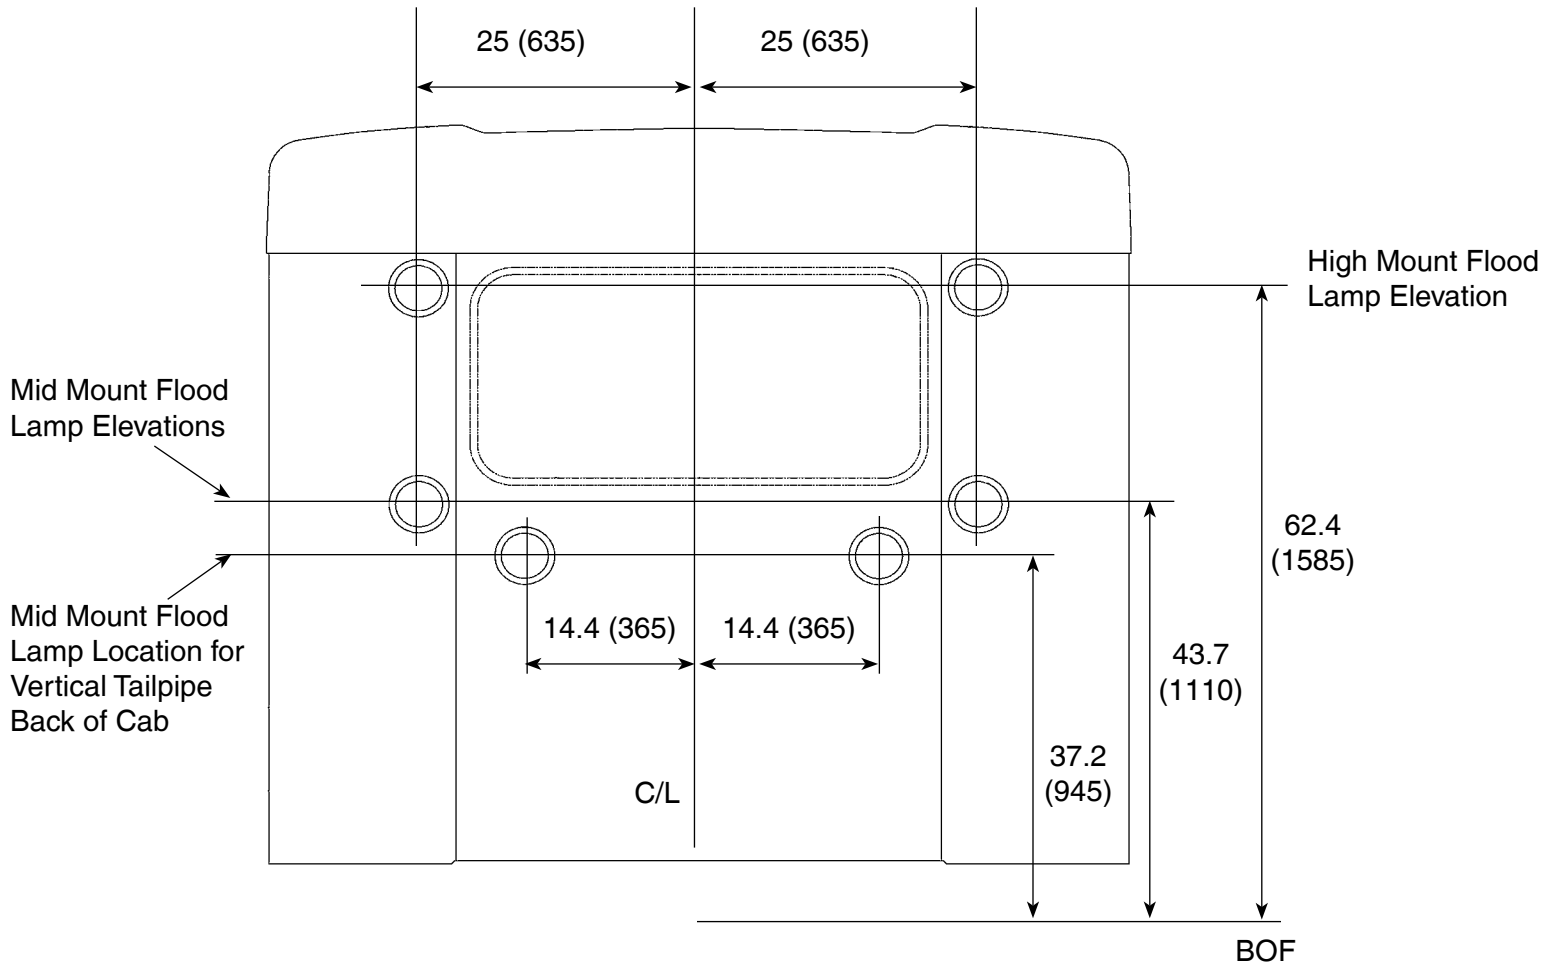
Flush Mounted Flood Lamp Locations [inches (mm)]
